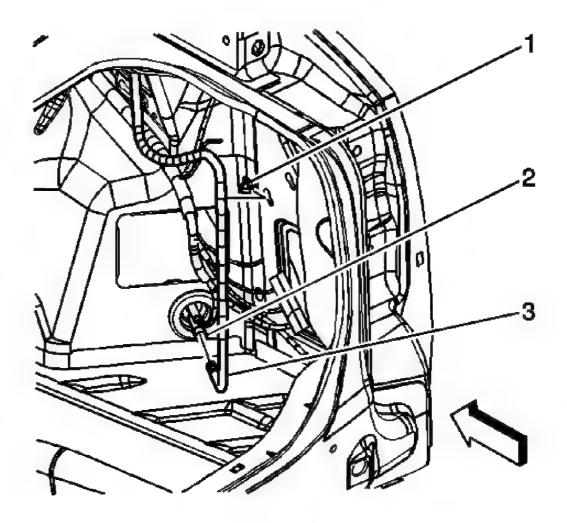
Identifying Rear Drain Hose Courtesy of GENERAL MOTORS CORP.
